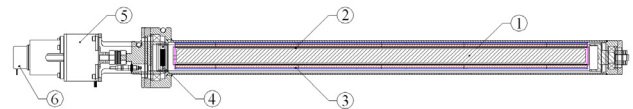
A cross-sectional view of the quadrupole rotating coil assembly. ① : Aluminum-oxide frame; ② : Outer coil; ③ : Inner coil; ④ : PCB for wire serialization; ⑤ : Stepping motor; ⑥ : Incremental encoder.
